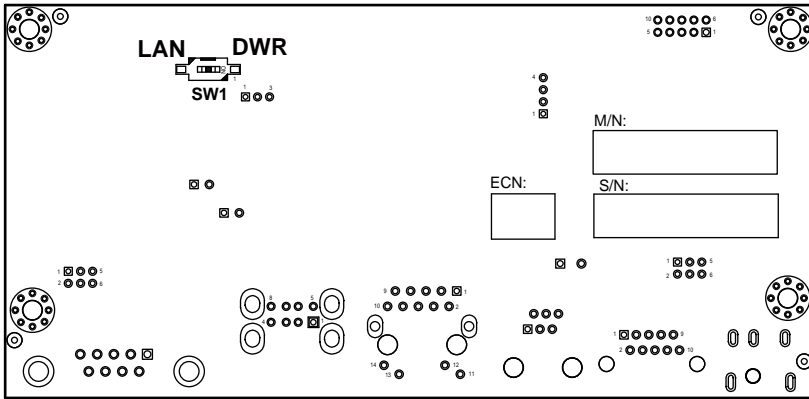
MR-5100RA-5 Daughter Board Component Locations (Bottom View)
